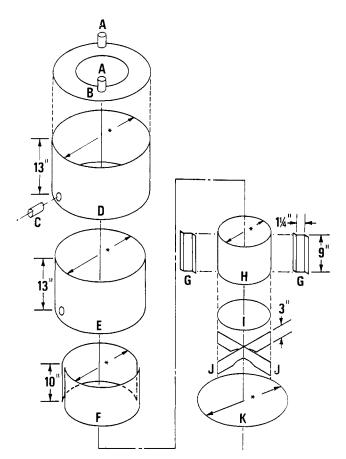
Vacuum solvent traps for rotary-evaporation unit 304 Stainless Steel, Sides, 16 Gauge, Bottom, 14 Gauge; ³/₄ Galvanized Steel, Pipes
